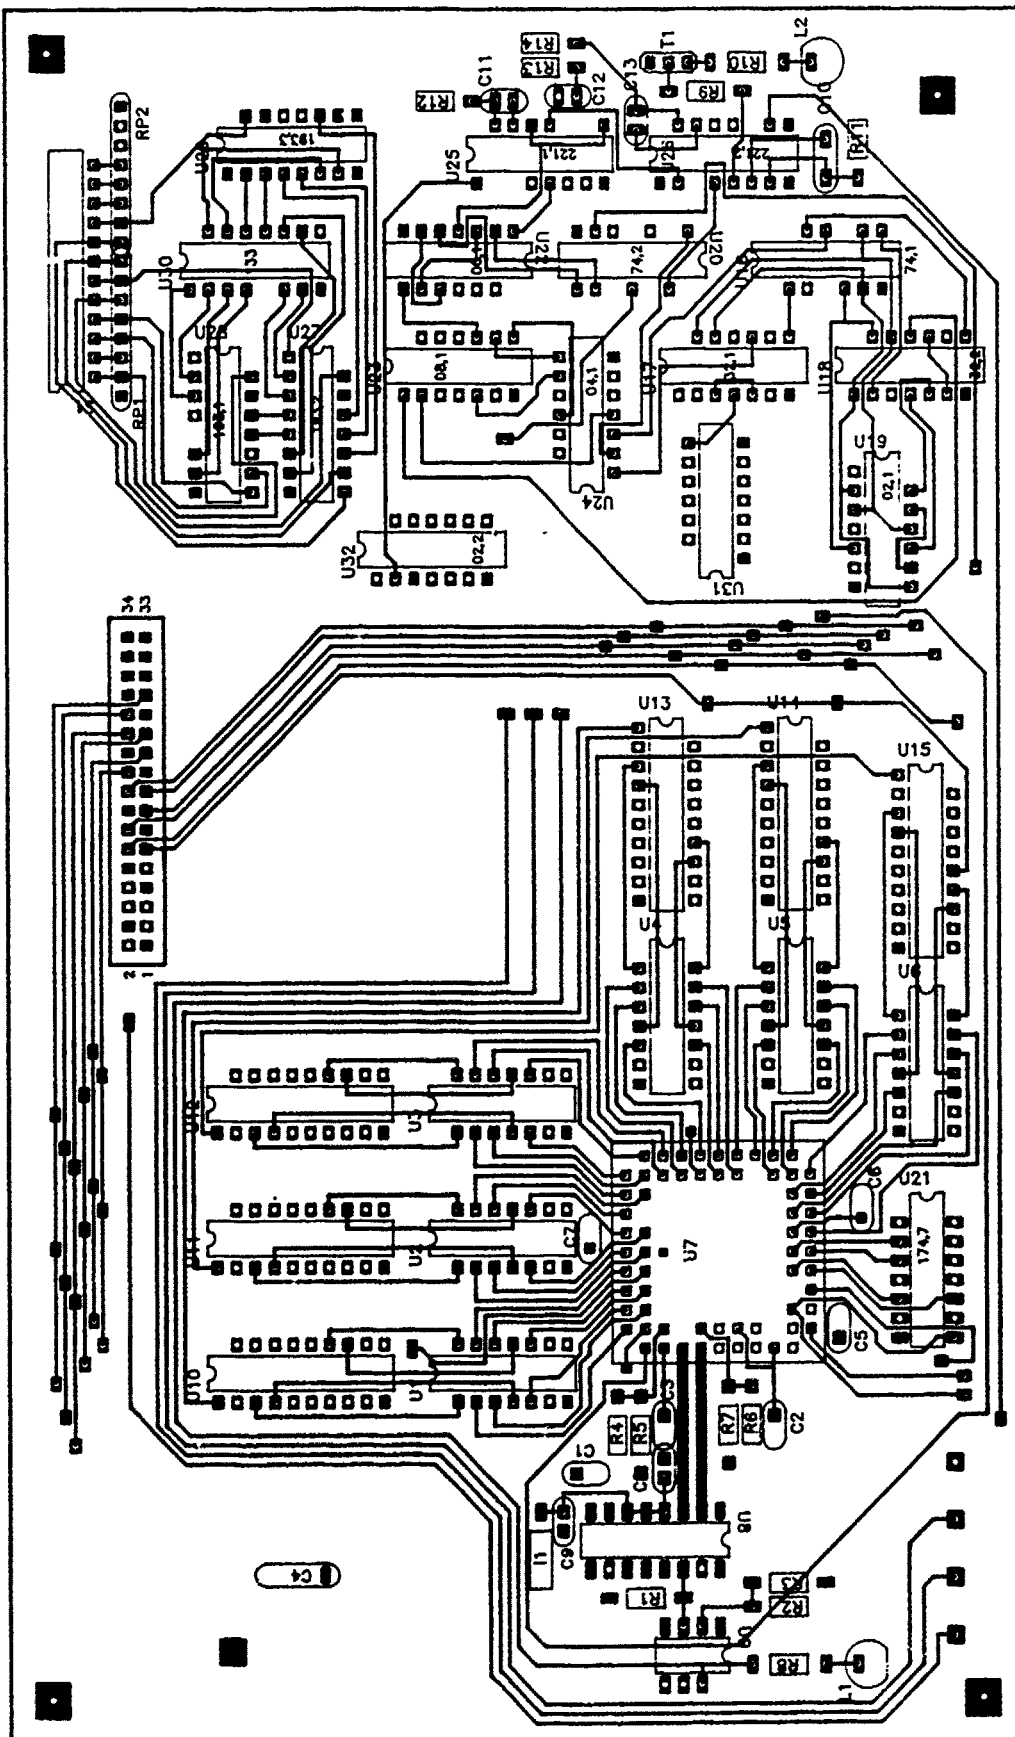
ITL Receiver Board - PC Board Layout (BOTTOM)
